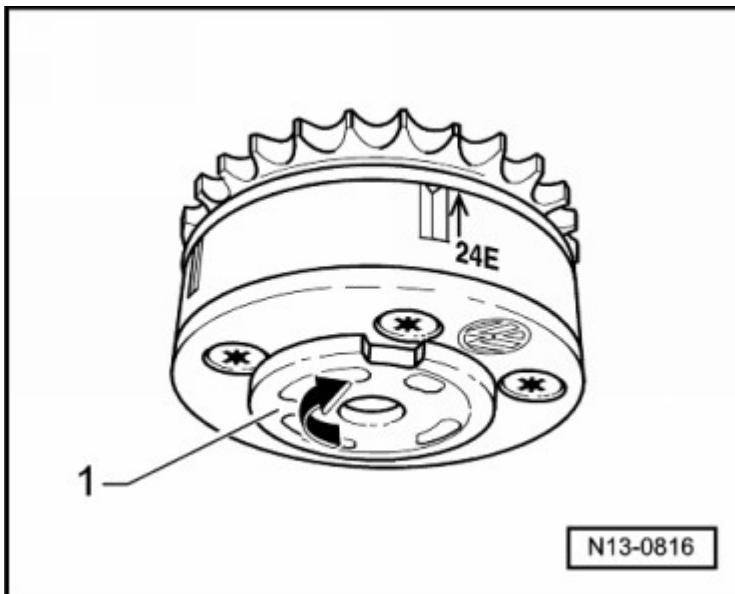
Identifying Sensor Wheel Turned To The Right At Intake Camshaft Adjuster
